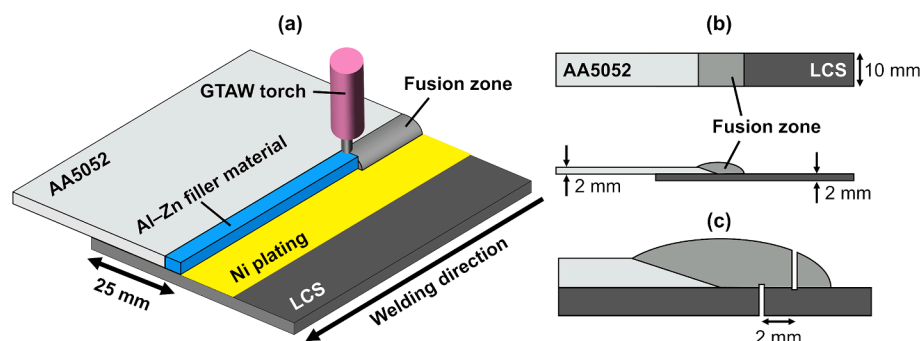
Schematics of (a) the GTAW-based brazing process, (b) dimension of a tensile shear test specimen, and (c) location of slits.
